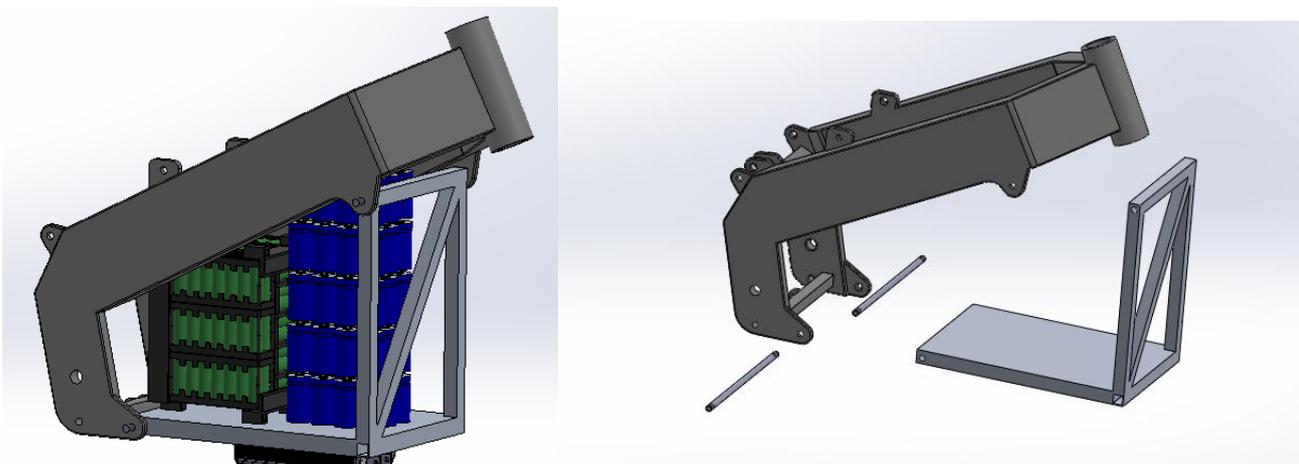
Frame with the cradle and powertrain components (left), Disassembly of the cradle (right)
